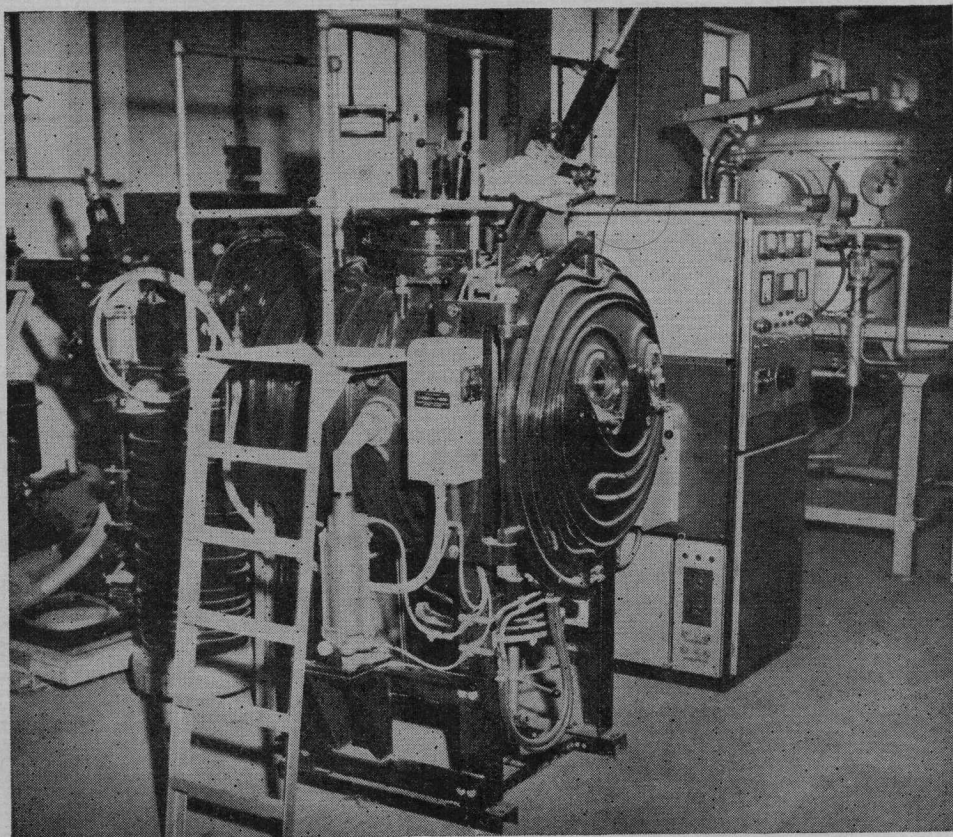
A VIEW OF THE 60 LB VACUUM INDUCTION MELTING AND CASTING FURNACE INSTALLED AT NML
